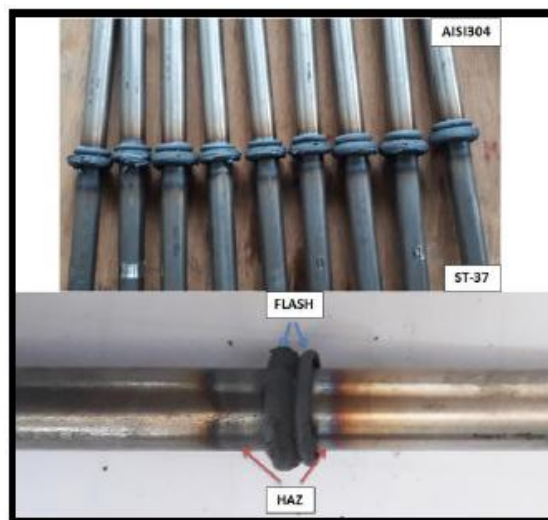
Some of the welded pieces and the flash formed in the welding area and (HAZ)
